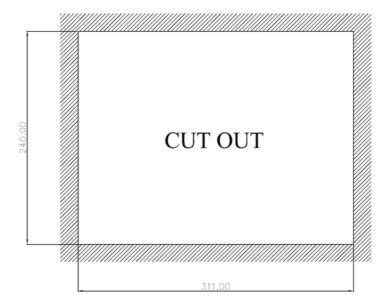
PPC-3120 Dimensions (Unit: mm)
